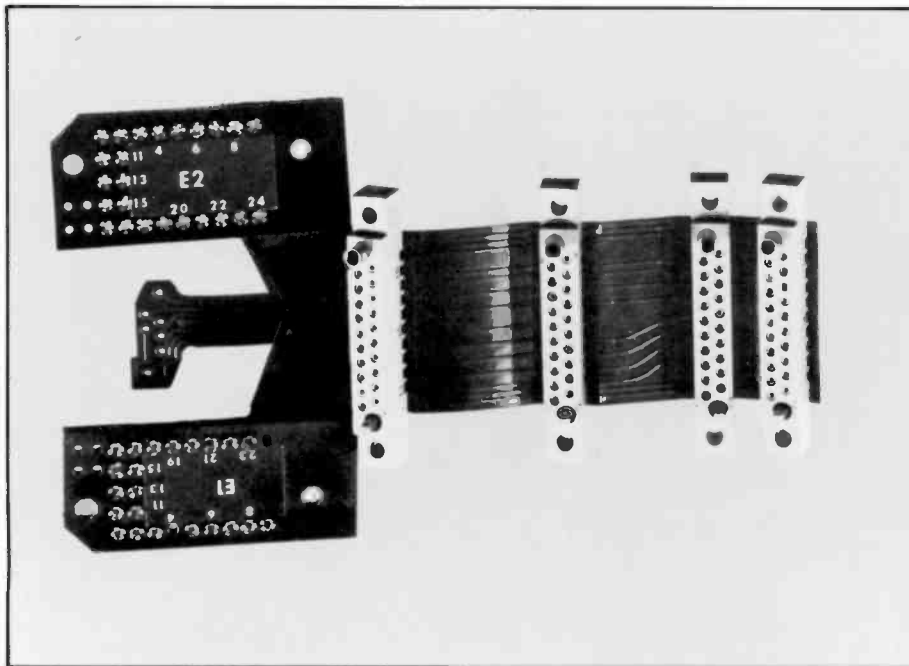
Most of the chassis wiring is accomplished by a flexible printed wiring assembly. The flexible wiring is assembled with connectors prior to installation in the chassis.
